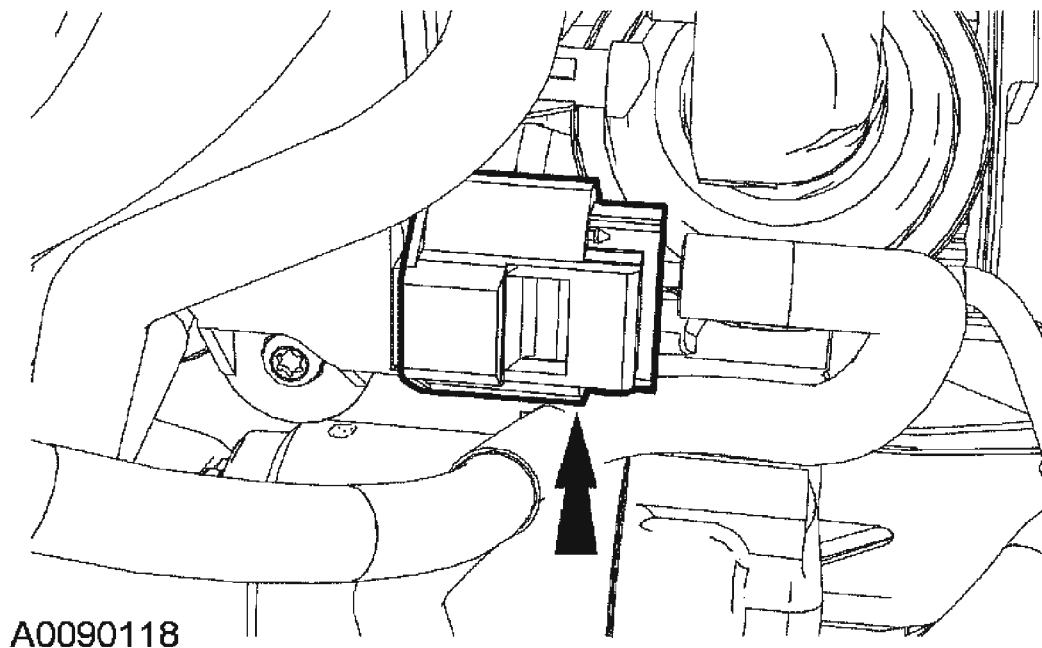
Connecting Manifold Absolute Pressure Electrical Connector
